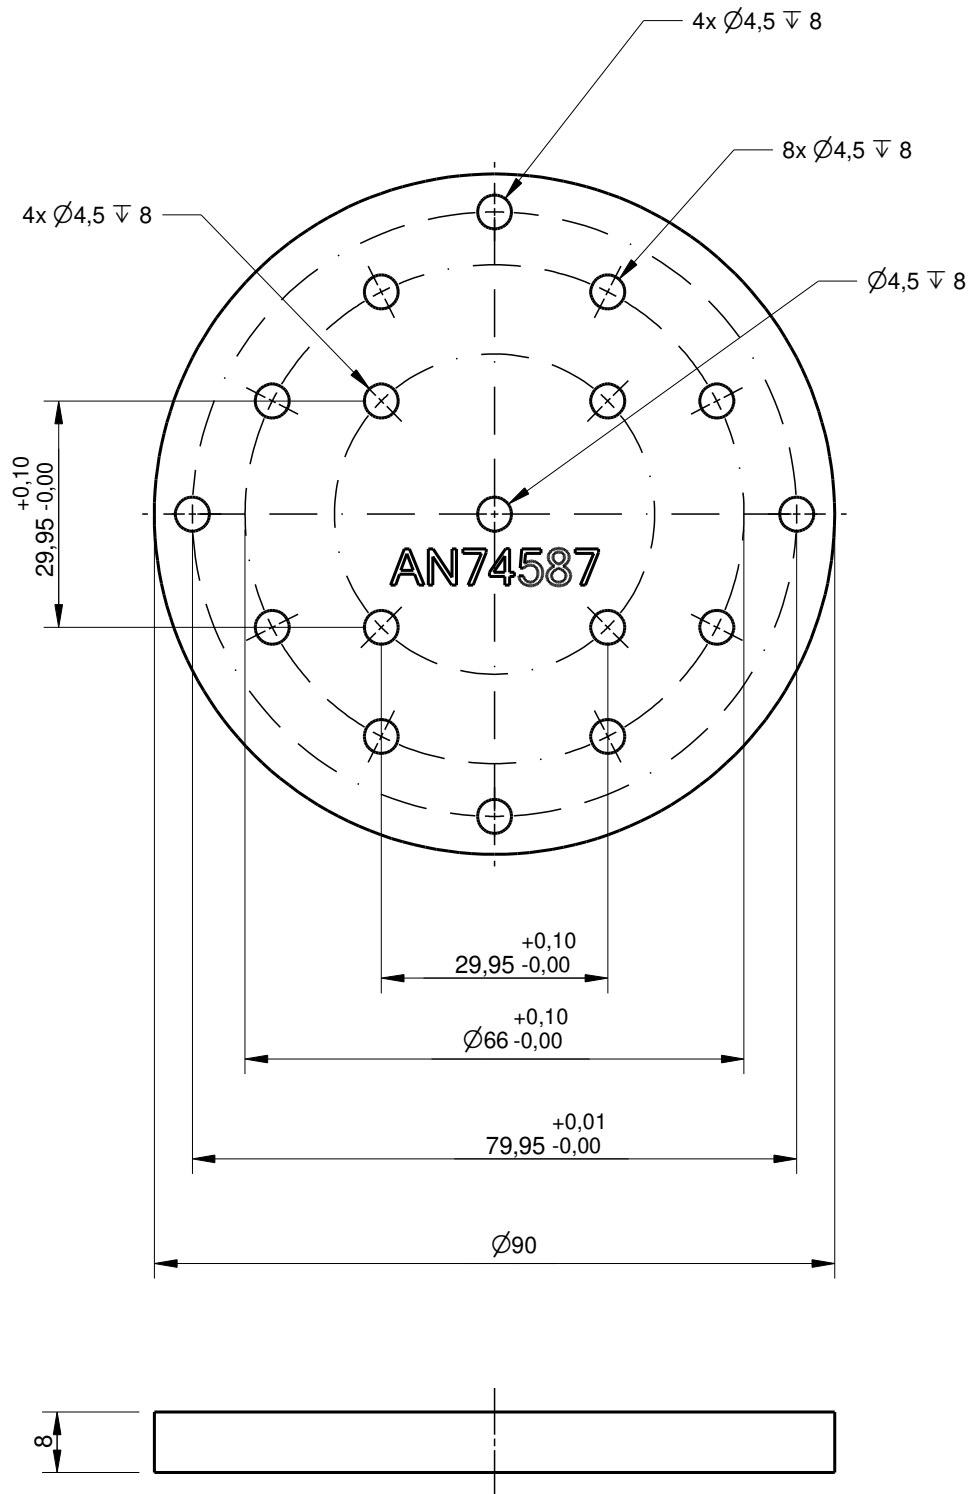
CAD design for bottom piece of bonding apparatus with single plunger. Sizes are in mm. Design created by Montfort Laser and Prof. Michael Mayer.
